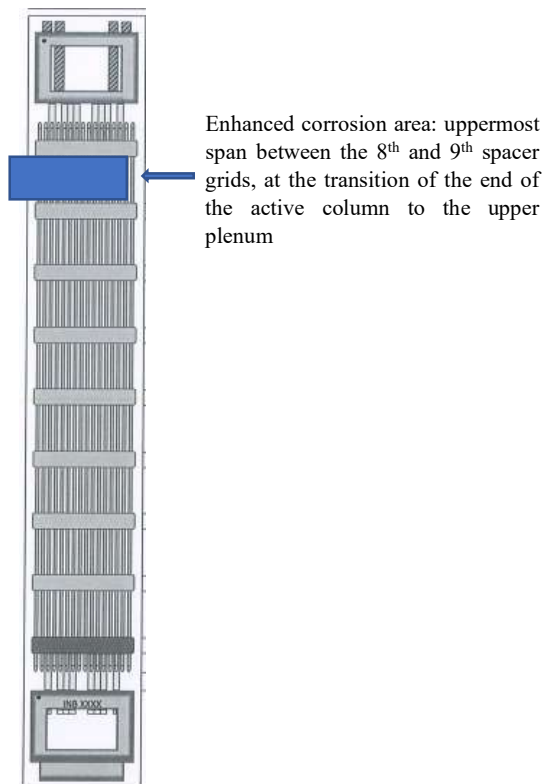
Sketch of the fuel assembly demonstrating location of enhanced corrosion.
